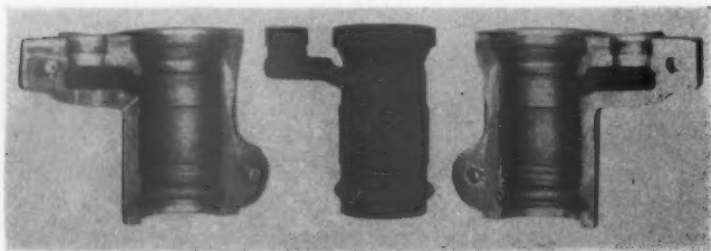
VALVE BODY CORE WITH CORE BOX.
